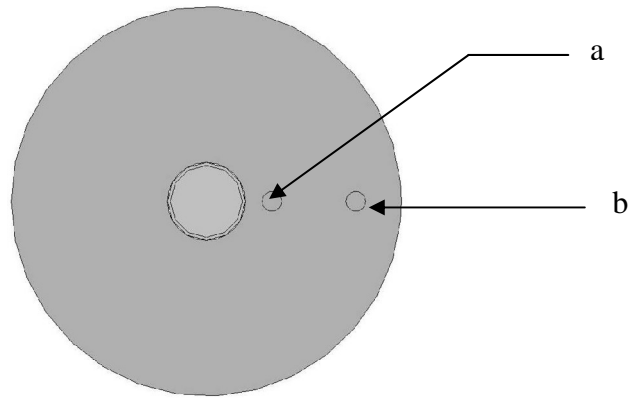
Magnet wire pass-through holes. The wire was pulled through the hole closest to the core (a) until approximately 100 millimeter (4 inch) protruded. After sufficient wire was wound around the core, the wire passed through the outer hole (b) until approximately 4 inches protruded.
